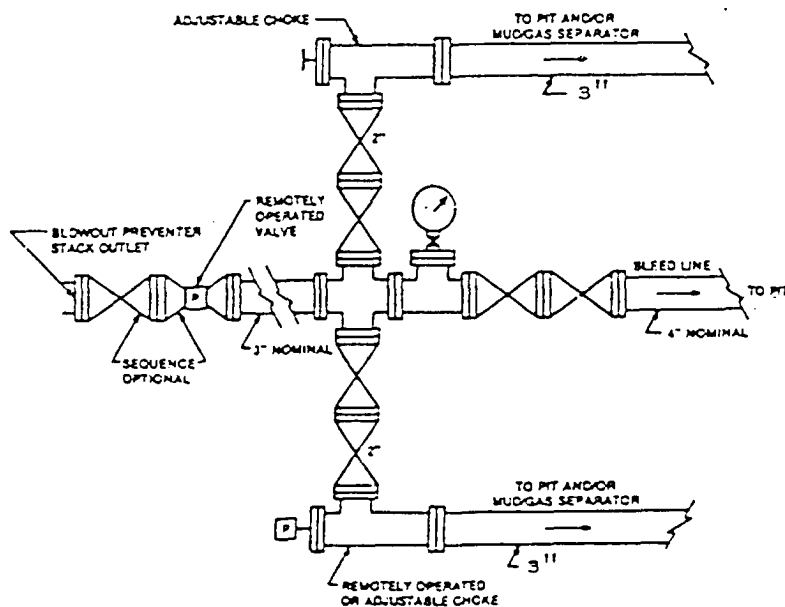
Typical choke manifold assembly for SM rated pressure service — surface installation.
